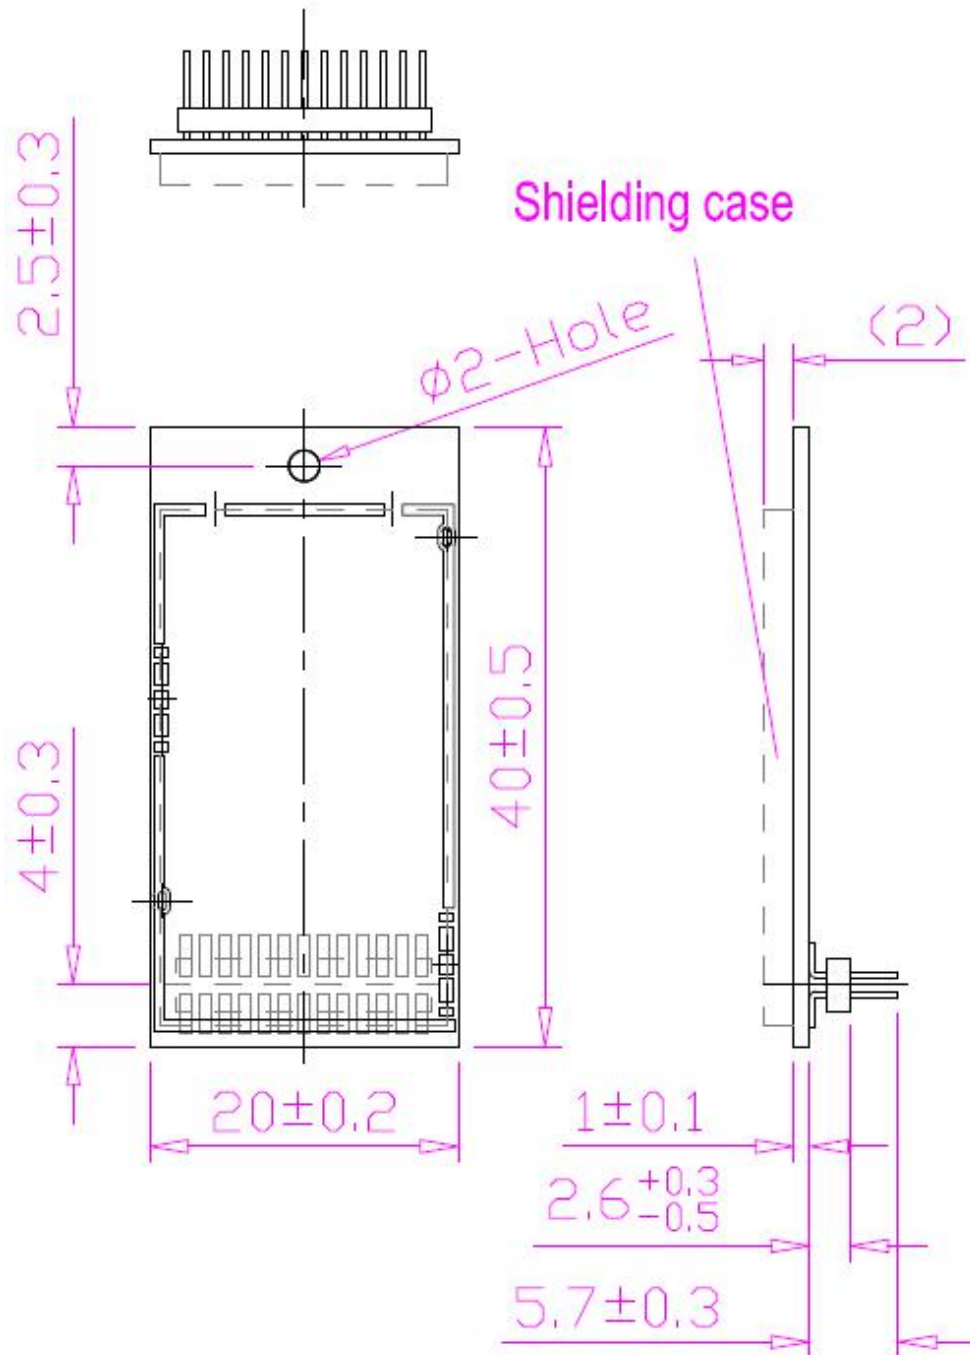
Mechanical Drawing of S83D-F Module with shielding case
